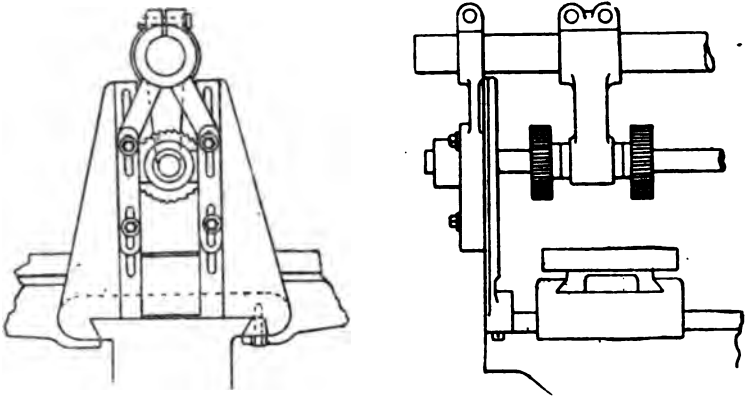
Double Cast Bracing with Slot-hole Attachments.
